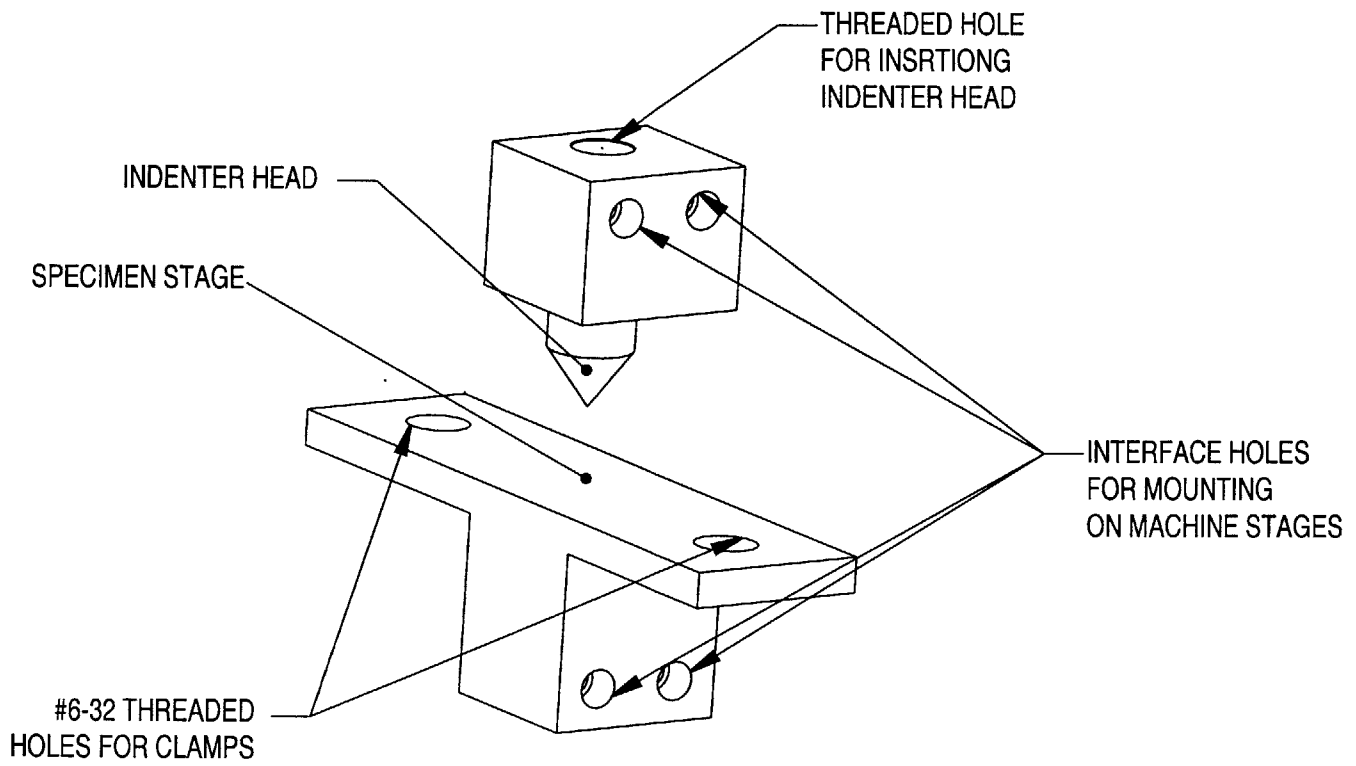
Indentation test configuration. Indentation stage is Part GS0900-02 and indenter holder is GS0900-01.
